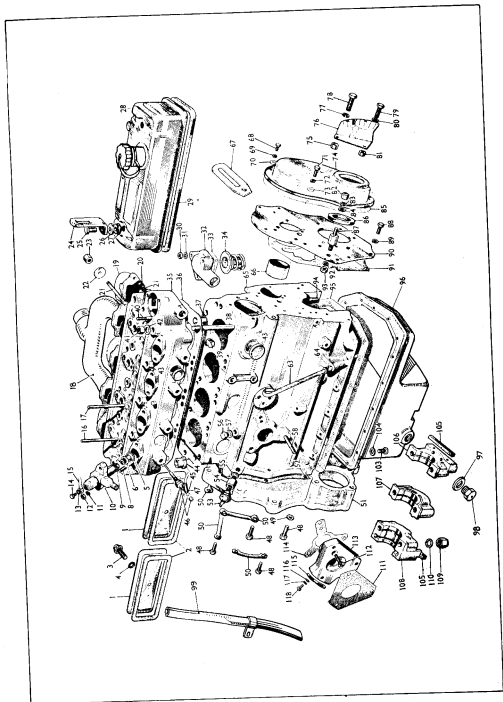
1.5 LITRE DIESEL - BASIC ENGINE ASSEMBLY
